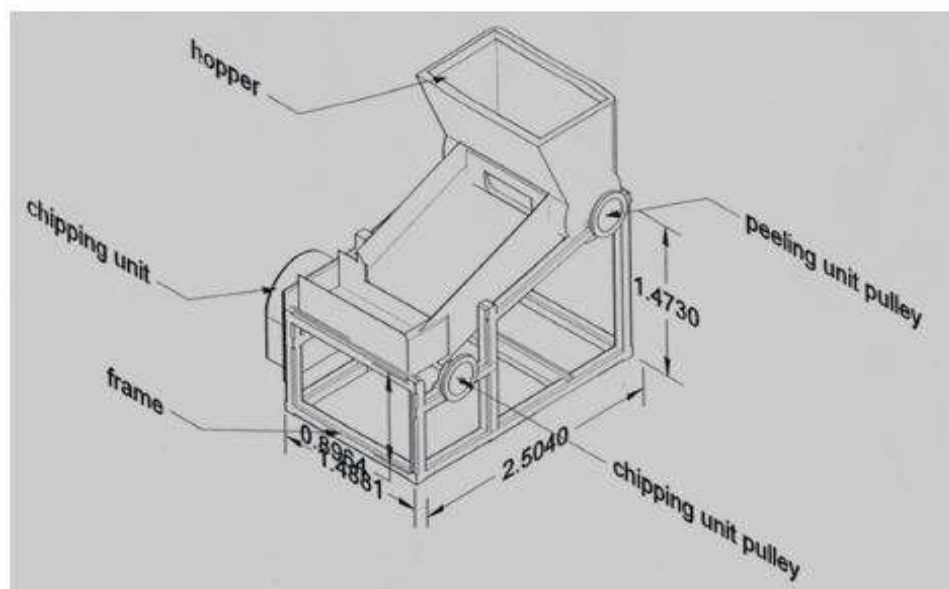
An isometric view of the electrically operated peeling and slicing machine
